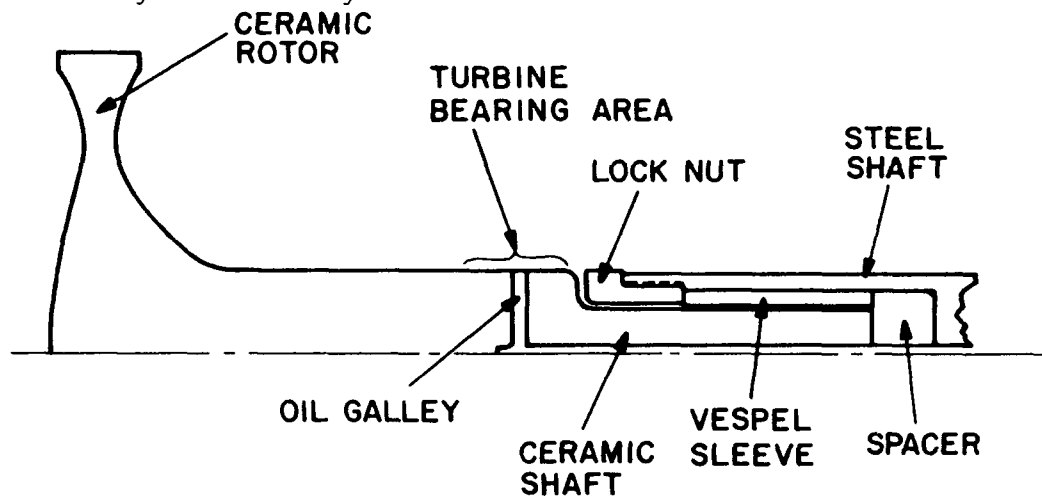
Cross-sectional view of non-threaded high expansion lock rotor assembly.
